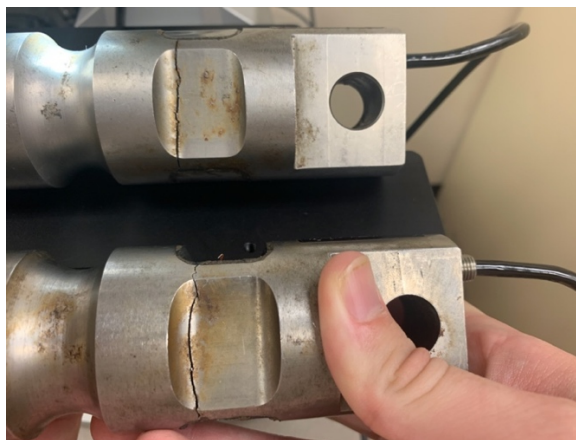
Fractured and Unfractured Loadcell Side-By-Side. The unfractured loadcell is depicted above the fractured loadcell
